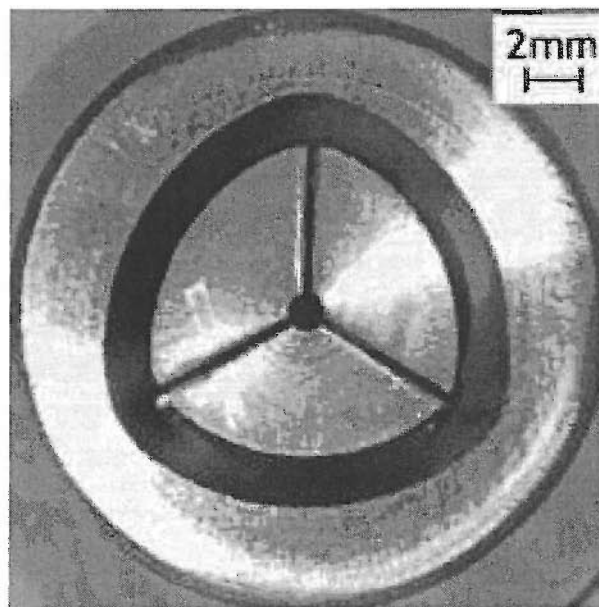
An extrusion die used to manufacture holey fibre preforms.
